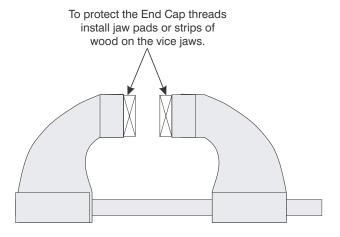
Pad the vise jaws to protect the End Cap threads.
